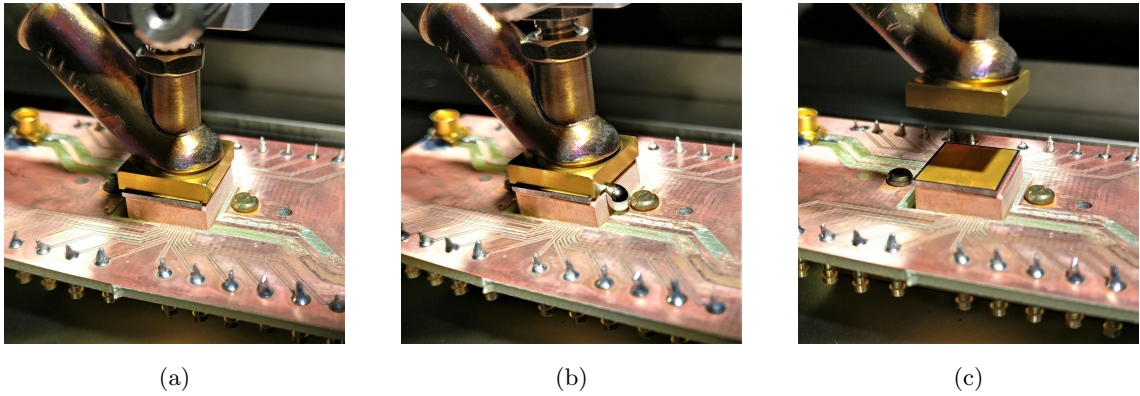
Diebonding process, (a) shows the chip under the heated head before the indium has melted. (b) shows the melted indium ejected out from the sides of the trap. (c) after cooldown and excess indium removal the heated head is raised off the trap.
